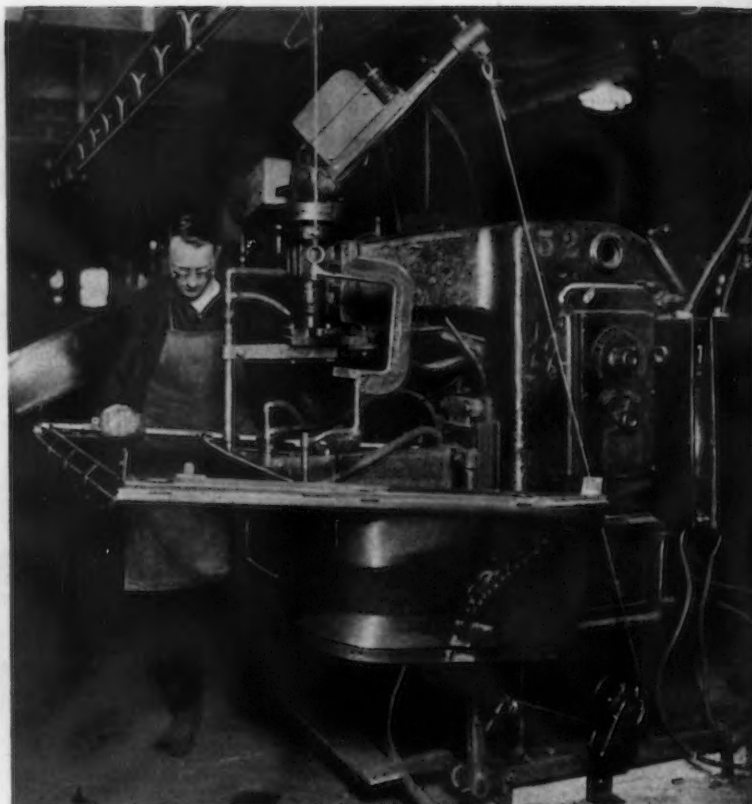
One of the 19 Machines Required to Assemble Front Ends of Auto Bodies. Slight pressure on foot treadle starts an automatic cycle which completes one spot weld
